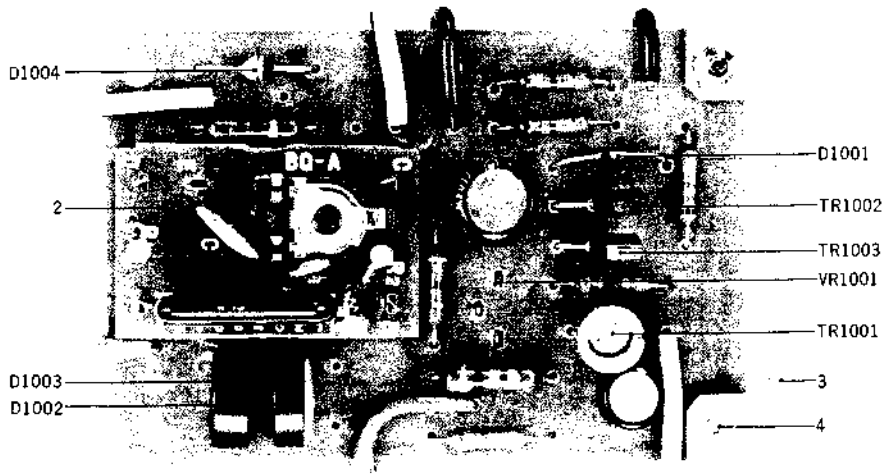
PHOTO OF FINAL ASSEMBLY BLOCK
